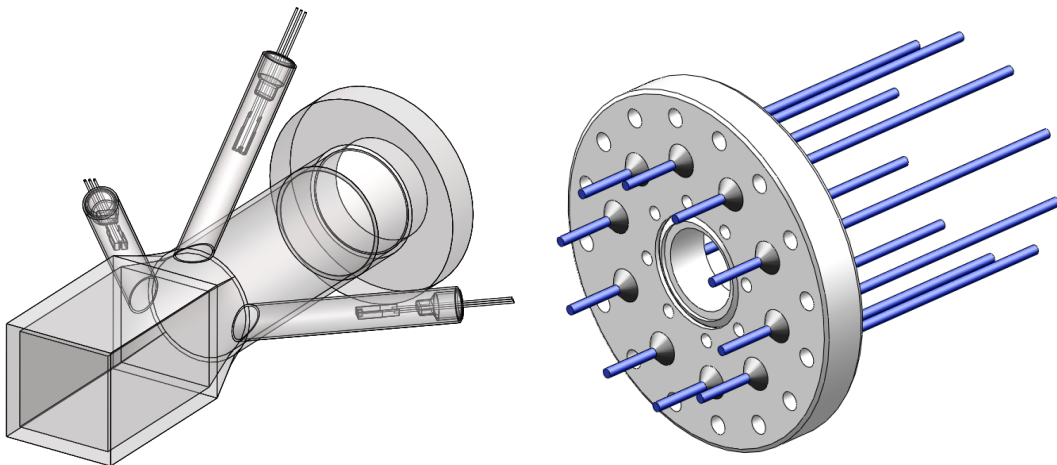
Solidworks drawing of the glass cell (left) and the feedthrough adapter flange (right).
